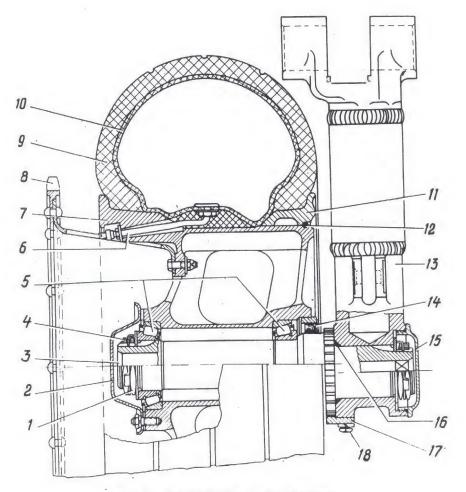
ATTACHMENT OF AUXILIARY WHEEL
